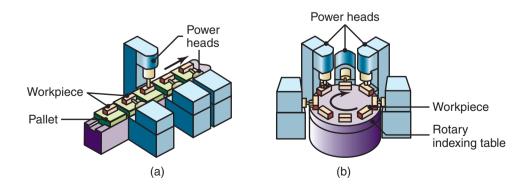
Two types of transfer mechanisms: (a) straight rails and (b) circular or rotary.
